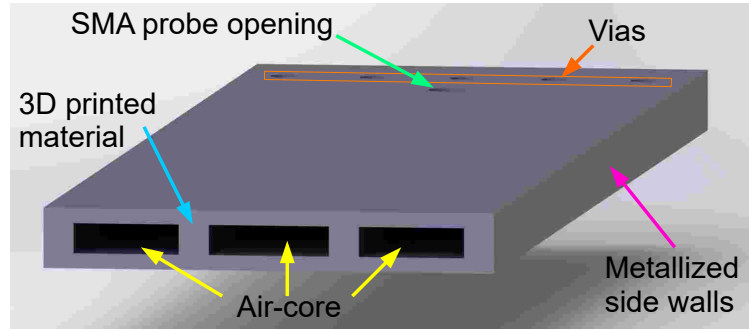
Diagonal view of 3D printed air core SIW which is cut in half to show the cross-section of the SIW.
